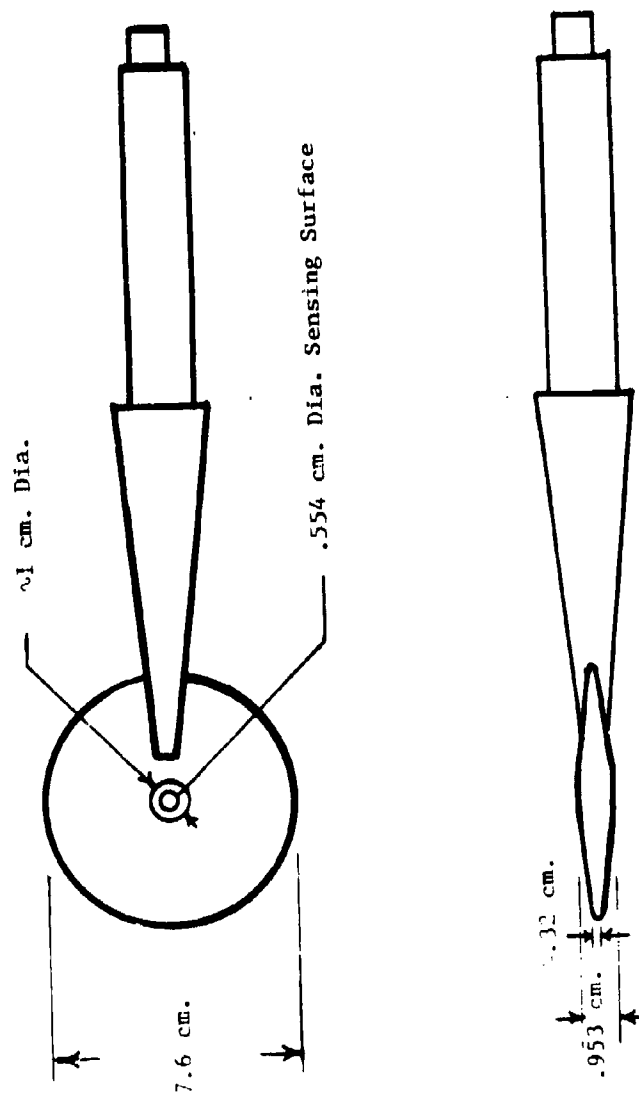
Detail of the ojive shape of the PCB lollipop.
